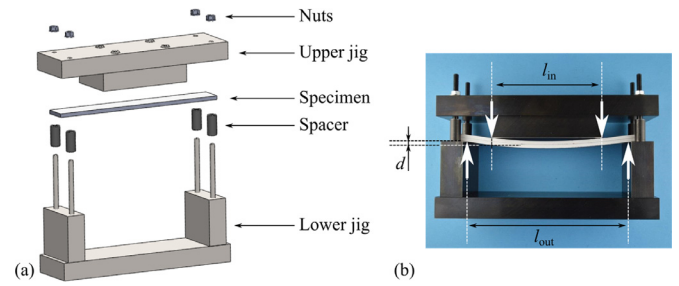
Four point bending jig (a) schematic illustration with each part separated, (b) side view of the jig when the specimen is set.
